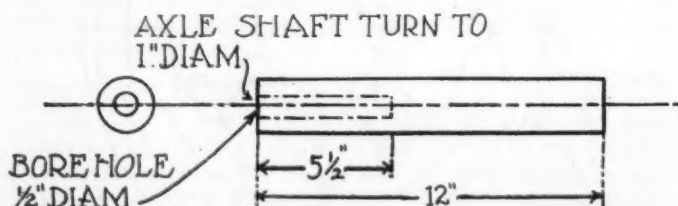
SHAFT STRAIGHTENING TOOL FOR FORD STARTER SHAFT
